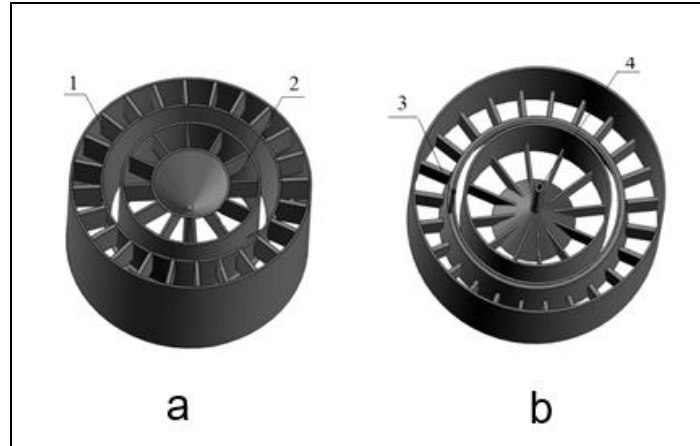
Physical model of the two-row swirler combustor studied: a – frontal view; b – backside view; 1 – outer swirler, 2 – inner swirler; 3 – fuel supply for the outer swirler; 4 – fuel supply for the inner swirler
